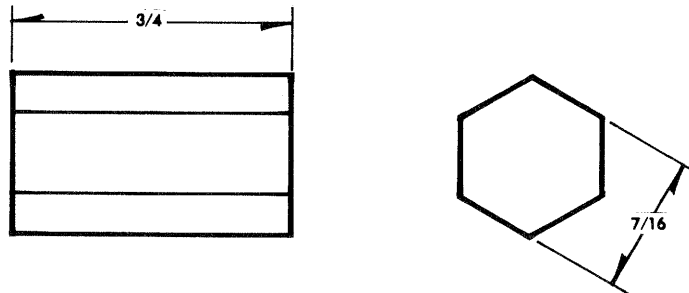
B. Work Aid, Tail rotor Driveshaft
